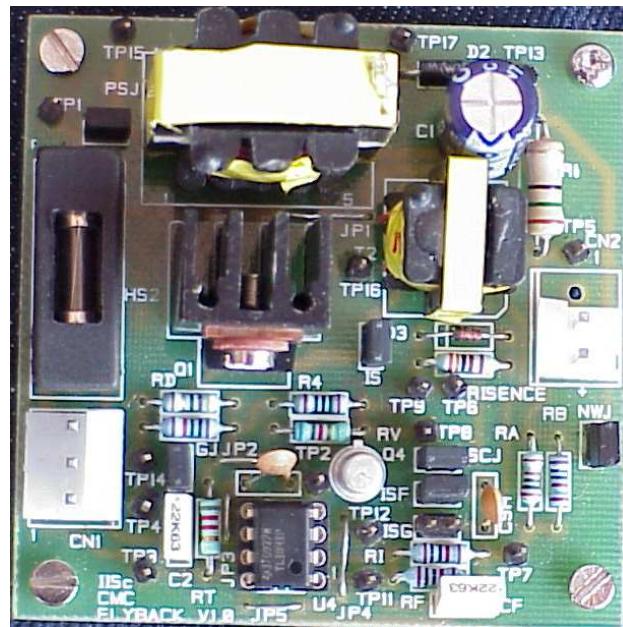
Mounted PCB Board of the CMC-flyback Converter
